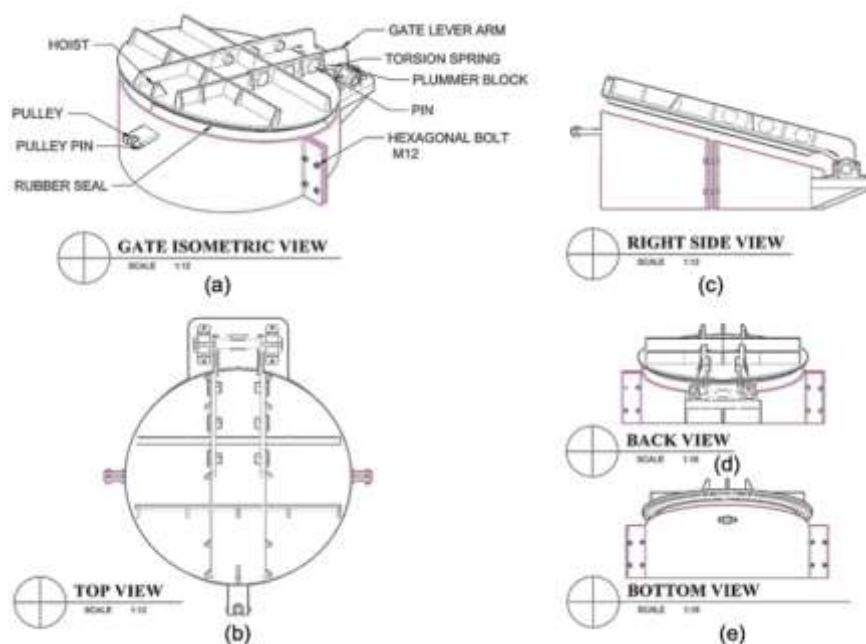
Self-activating drainage gate (a) Isometric view, (b) Top view, (c) Right side elevation, (d) Back view, (e) Bottom view
